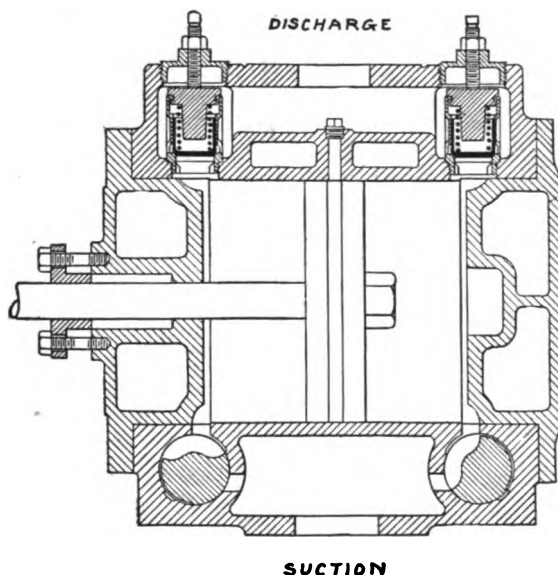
Art. 242. — Compressor Cylinder with Rocking Inlet Valves. (Clayton Air Compressor Works.)
